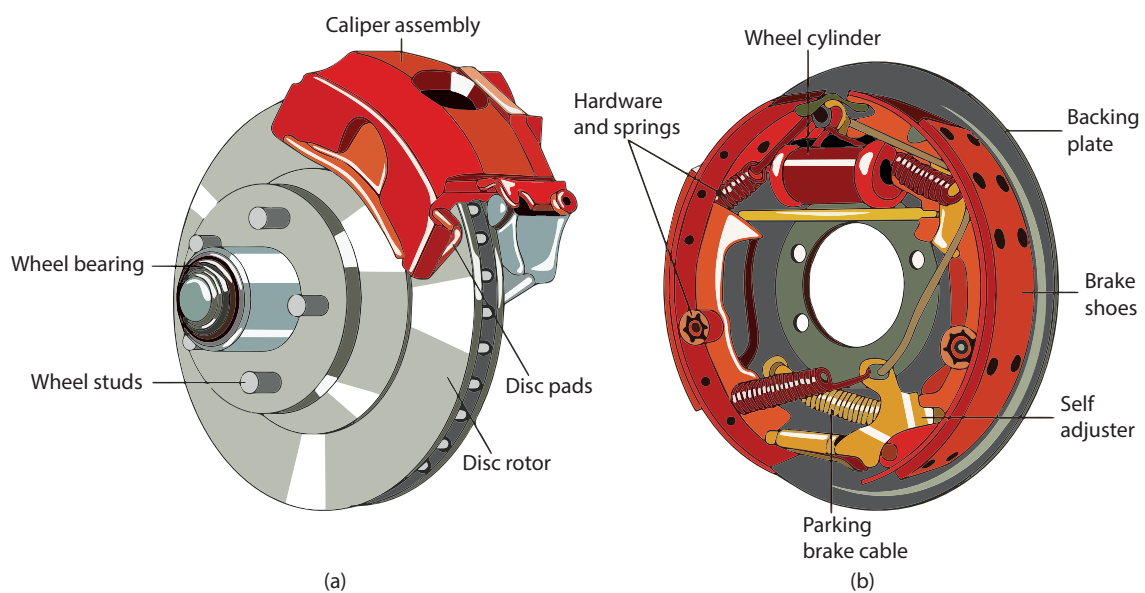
Illustrations of braking mechanisms used in the automotive industry. (a) A disc brake mechanism. The disc pads in the caliper assembly can push against the disc rotor to initiate a brake. (b) A drum brake mechanism [19]. When braking, the brake shoes are push outwards by the wheel cylinder causing friction between the brake shoes and an outer cylinder.
